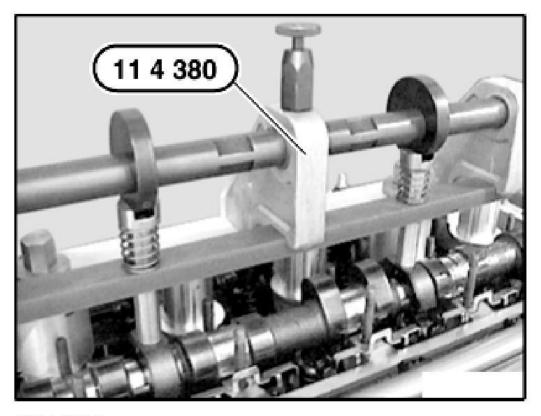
Locating Bearing Caps Courtesy of BMW OF NORTH AMERICA, INC.
